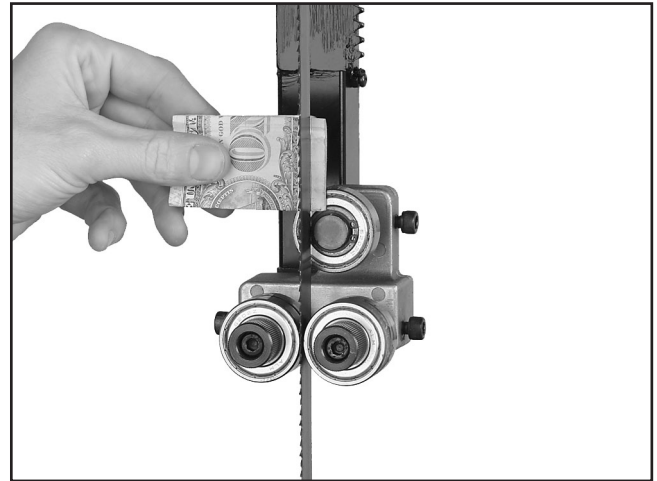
Dollar bill folded twice to make an approximate 0.016" gauge.
